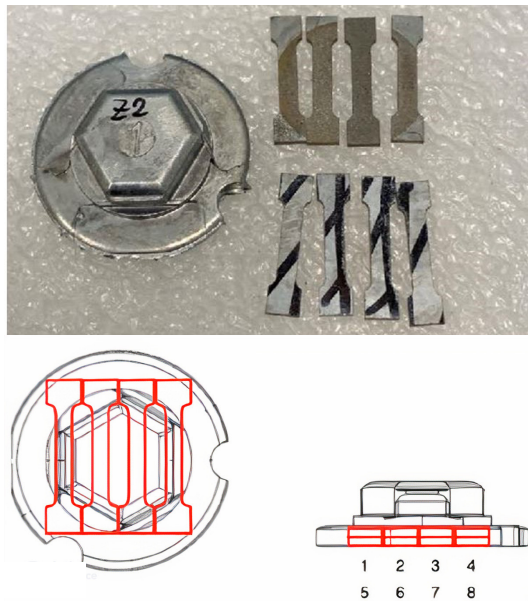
Pattern of cutting out the samples for mechanical tests and photographs of those samples
